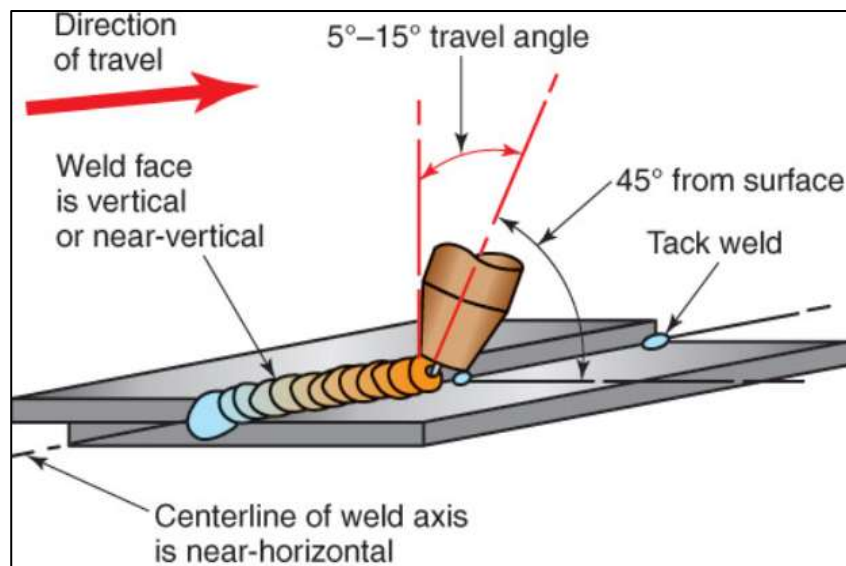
8: Horizontal Welding Position (Chen et al., 2013)
